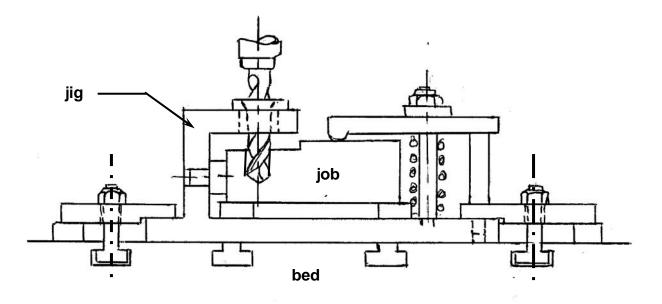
Mounting of job in a jig which is clamped on the drill - bed.
